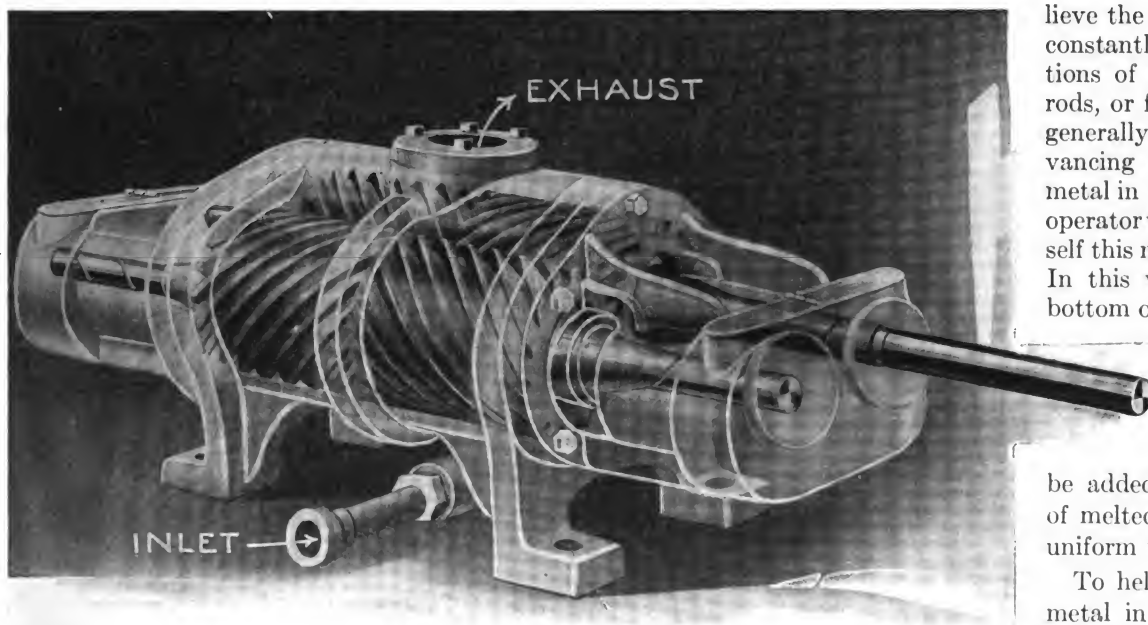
X-RAY VIEW OF THE TURBINE. STEAM ENTERS UNDERNEATH, AS INDICATED, AND EXHAUSTS AT THE TOP
